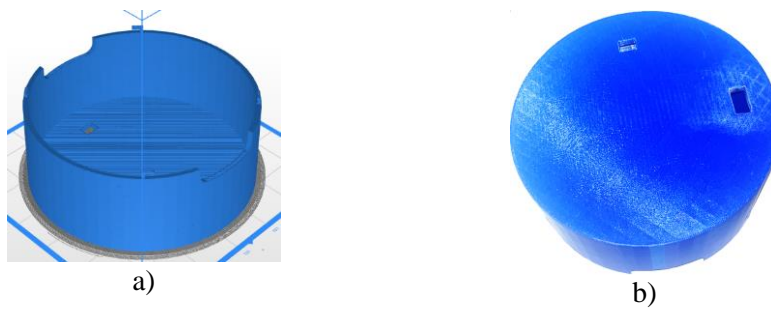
a) Part presentation on the printer, b) Physically produced top casing (finished product)
